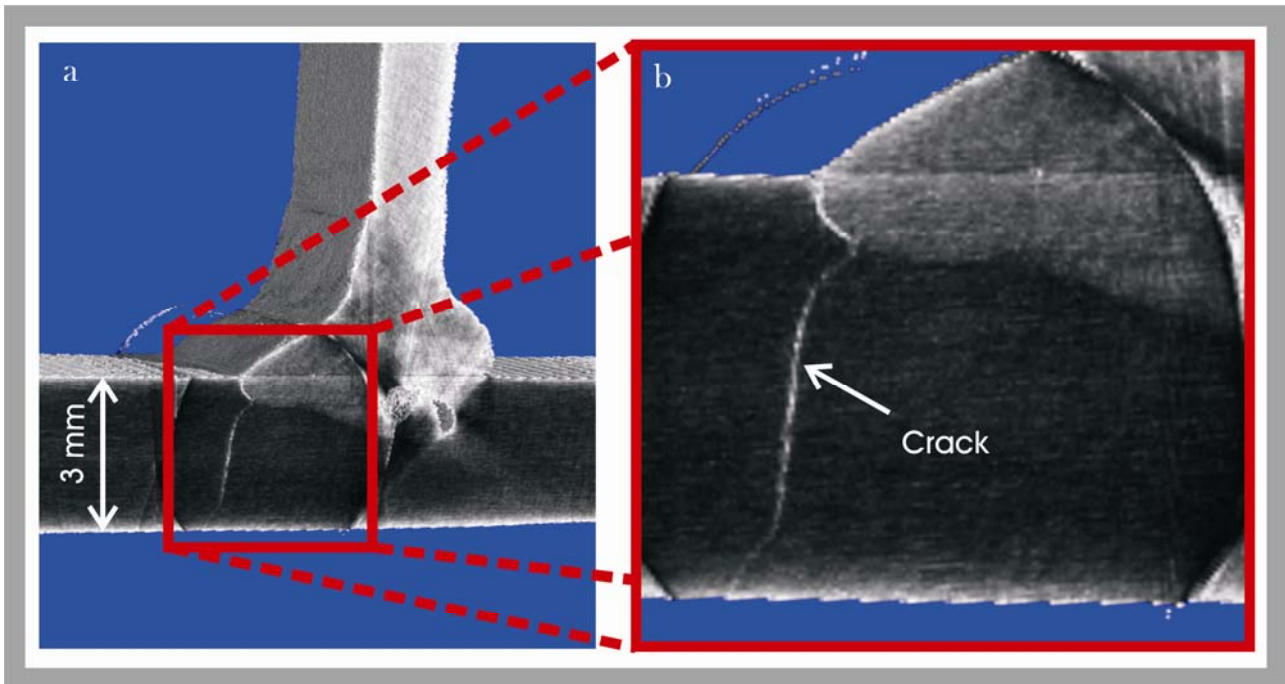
Tomogram of a T-joint after the crack initiation but before cyclic loading to propagate the crack. The aluminium alloys used in the weld are known for low porosity during laser welding. a) Complete sample as it was scanned using the region-of-interest technique at 70 keV X-ray energy. The different gray values represent the different absorptions of the materials. The crack, the aluminium alloy of the skin (bottom part of the sample) and the welded region can be clearly distinguished. b) Zoom into the region of interest that was scanned with a better spatial resolution.
